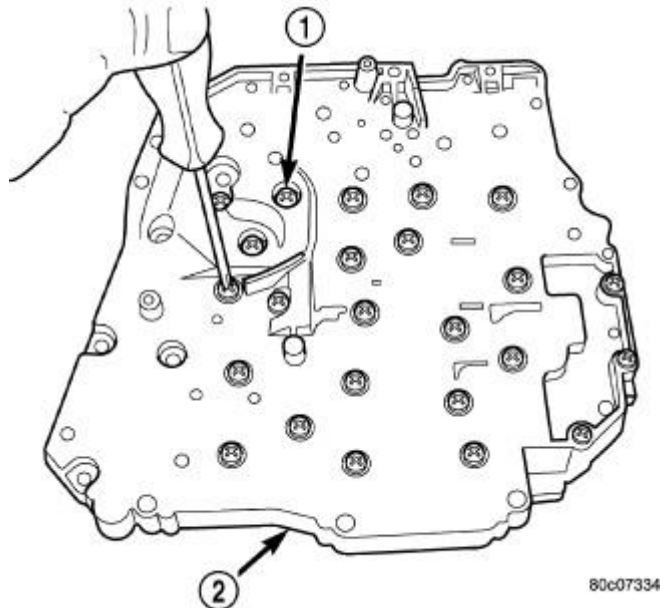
Remove/Install Transfer Plate-at-Valve Body Screws
